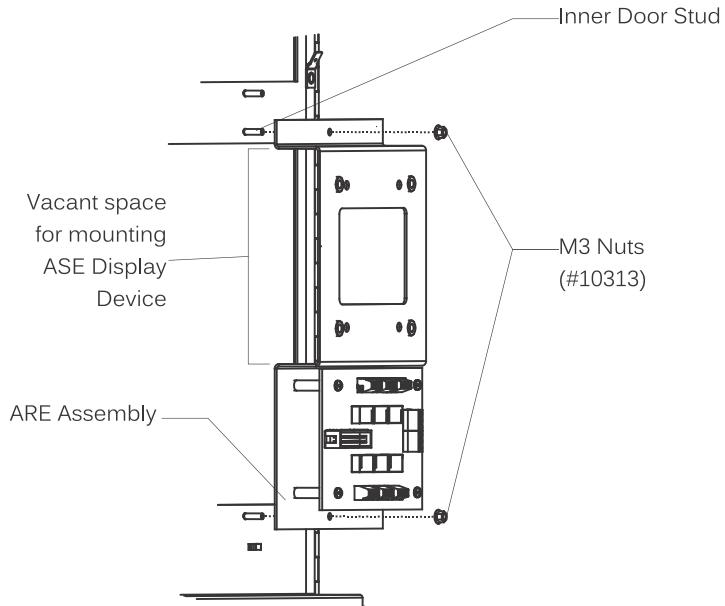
Mounting ARE Interface Assembly to Inner Door
